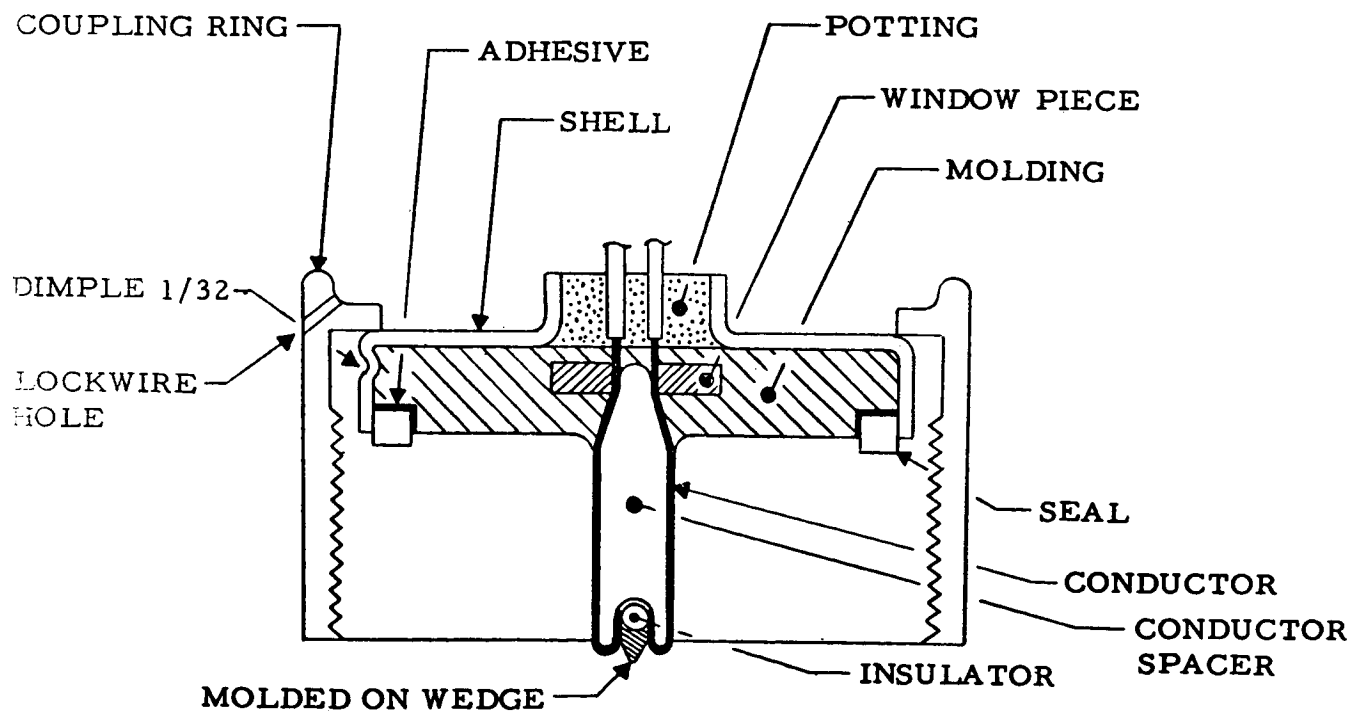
CYLINDRICAL PLUG (DIMPLED)
